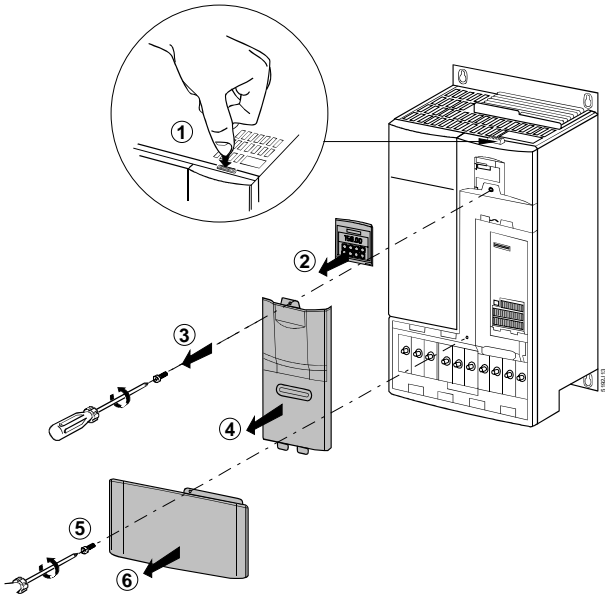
Access to Connection Terminals for SED2 Frame Size D and E.
